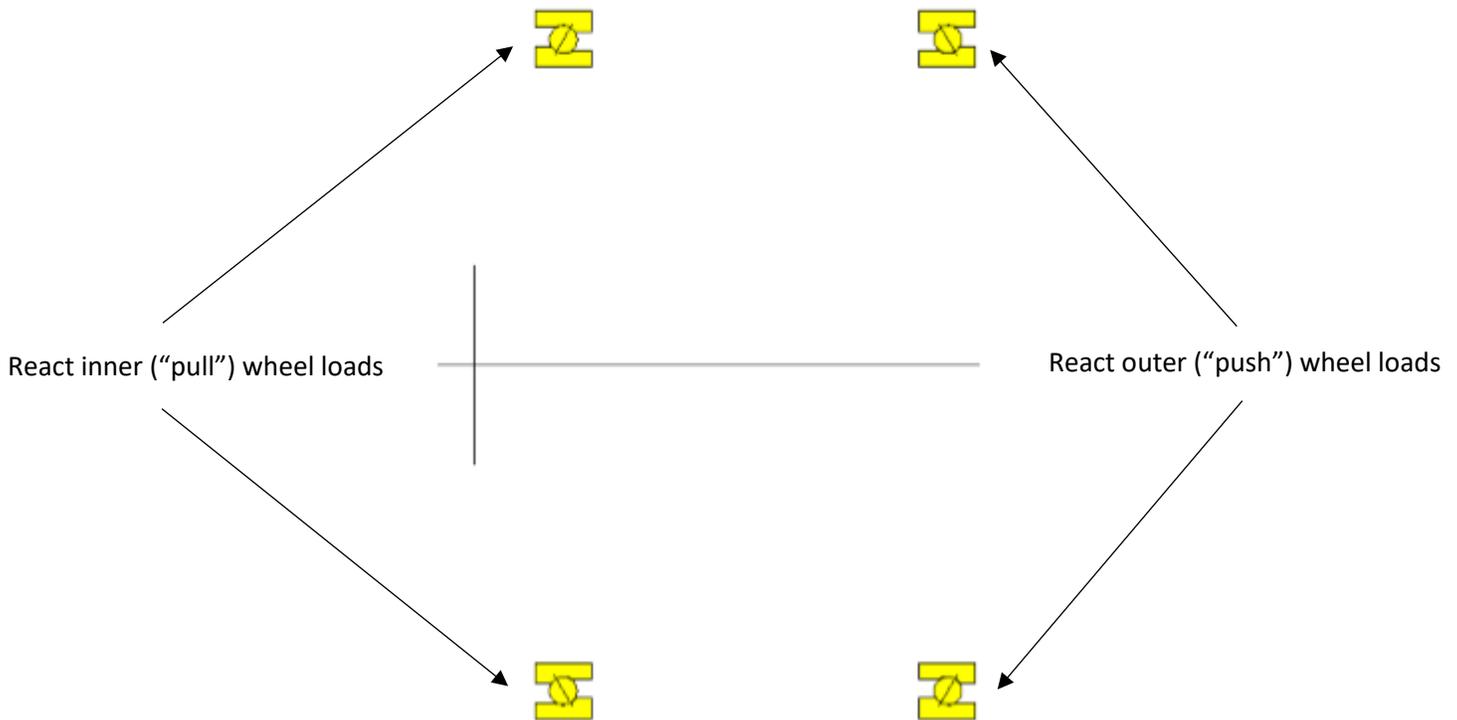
Back-to-back wheel bearing configuration (right side of car)
